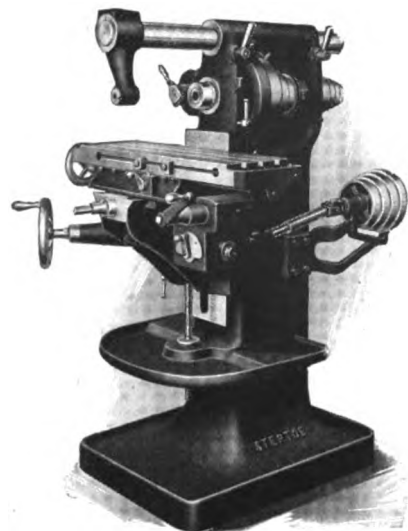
No. 0 Back Geared "Steptoe" Milling Machine
